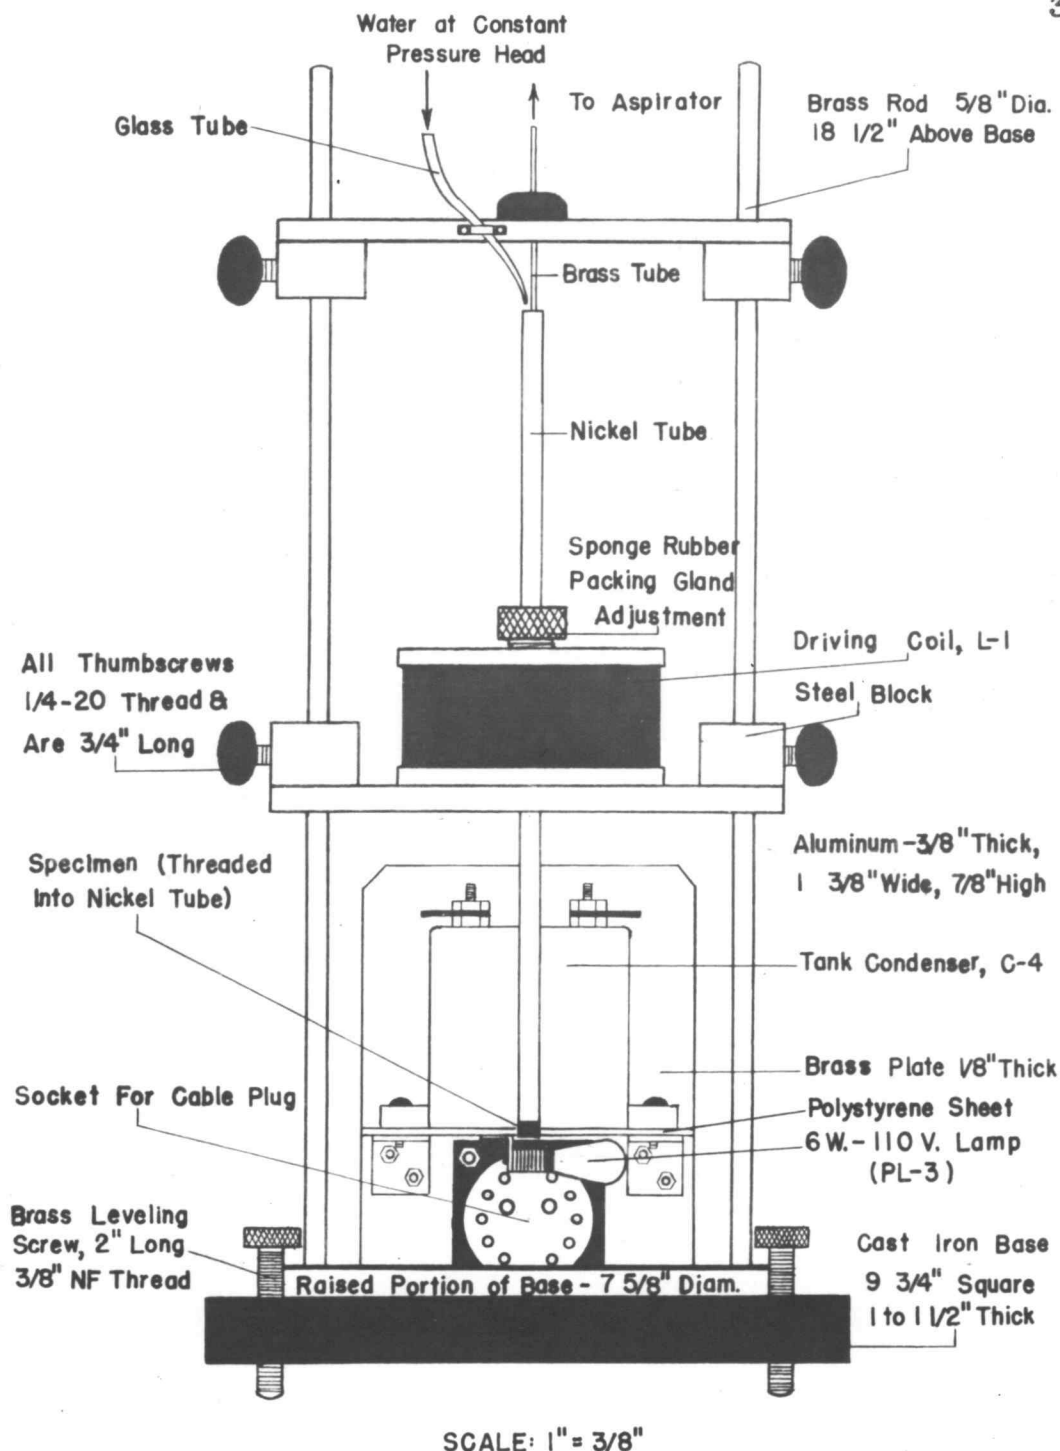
SECTIONAL VIEW OF DRIVING COIL ASSEMBLY, SHOWING COOLING WATER EXTRACTOR TUBE
